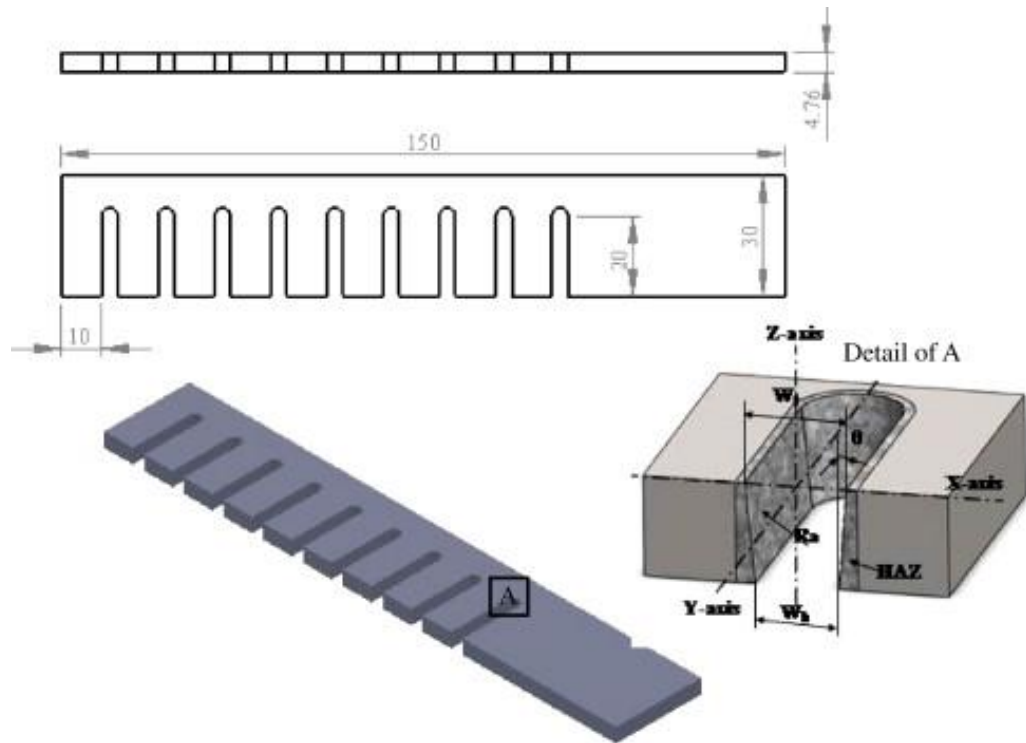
Drawing and 3D model with dimensions of the laser cut samples in mm [52]
